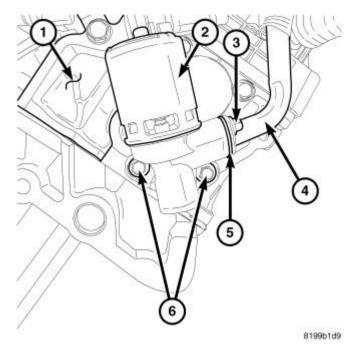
Cylinder Head, EGR solenoid/Valve, Flange Bolt, Tube, Gasket & Mounting Bolts Courtesy of CHRYSLER LLC
